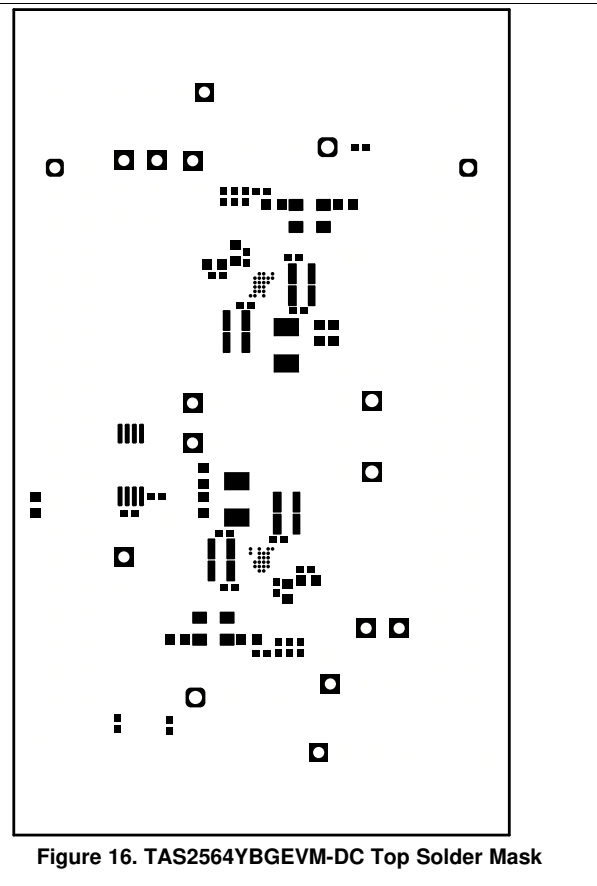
TAS2564YBGEVM-DC Top Solder Mask
